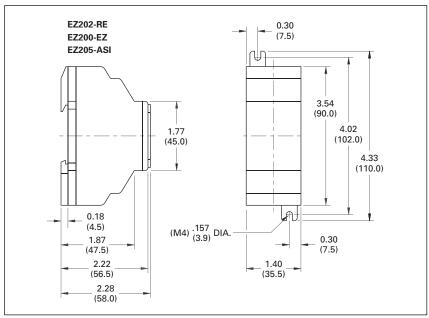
EZ202-RE/EZ200-EZ/EZ205-ASI Series Dimensions in Inches (mm), Drawing Number MD05013012E
